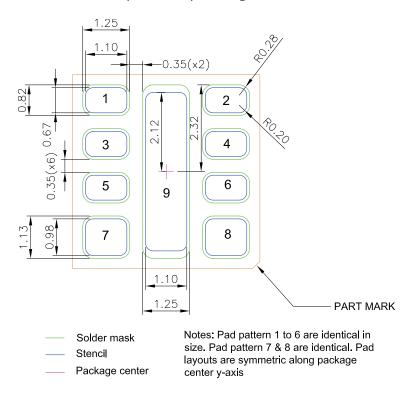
Recommended PCB solder pad layout for LUXEON 5052 RGBW.
